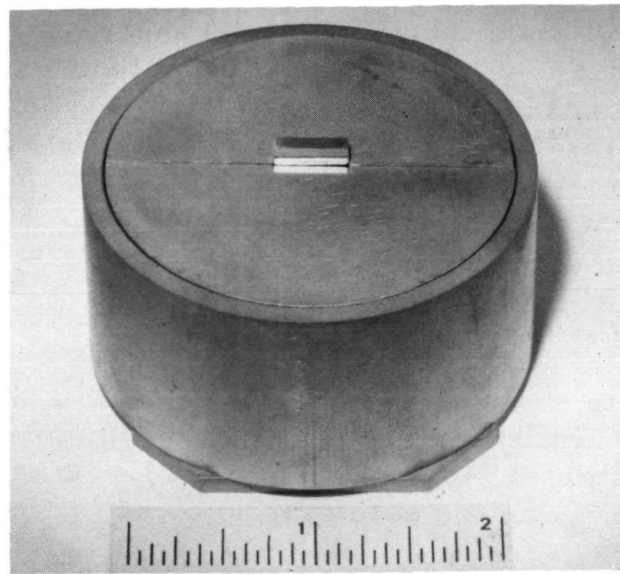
ROOM-TEMPERATURE COMPRESSION SHEAR TEST FIXTURES AND SPECIMEN
